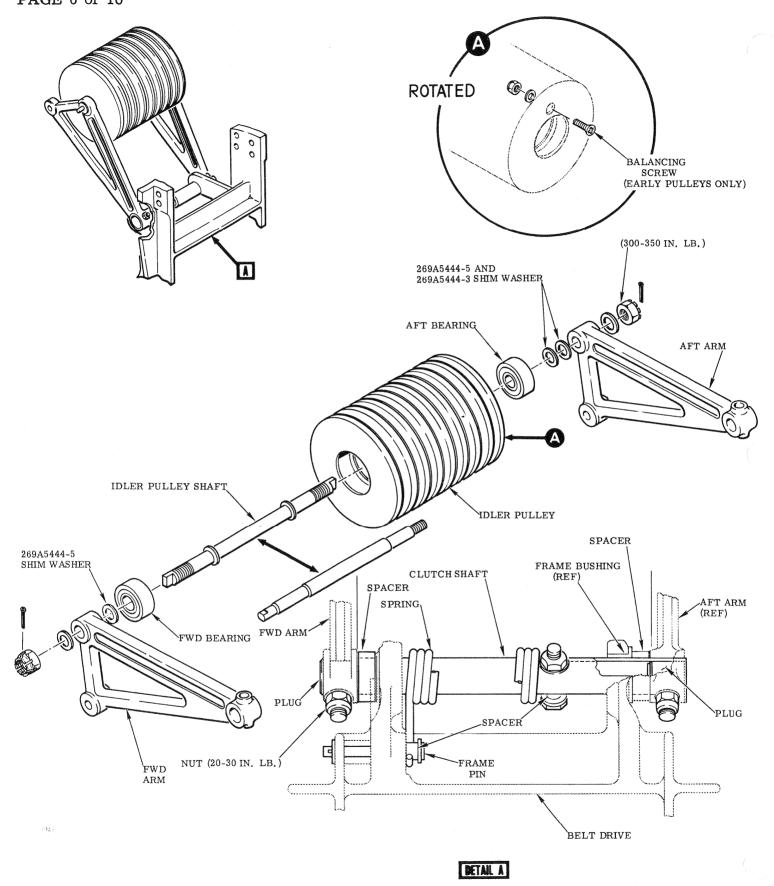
IDLER PULLEY CLUTCH ASSEMBLY (SHAFT-MOUNTED DUAL ARM SUPPORT)
